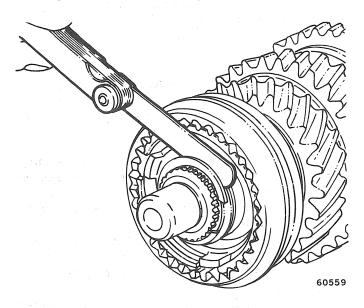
B-39 Checking Mainshaft Geartrain End Play
